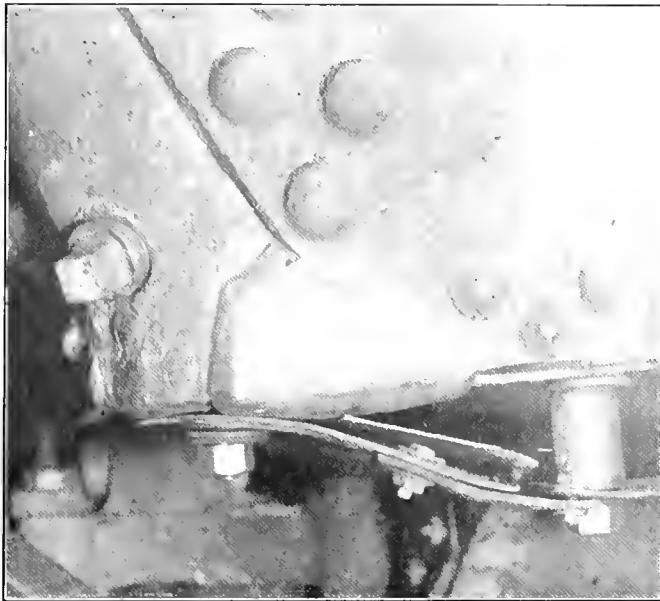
The Finished Weld on the Mud Ring and Sheet.
